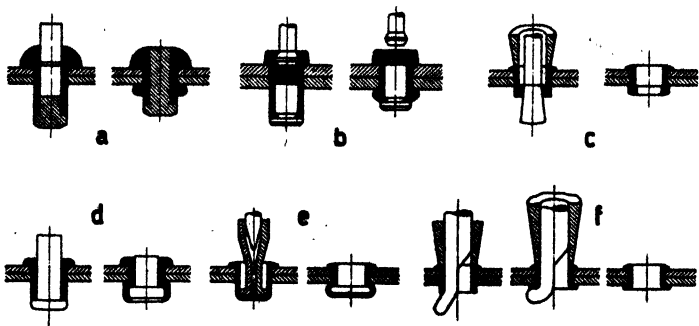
Special rivets for heading from one side without a holding-up dolly.
